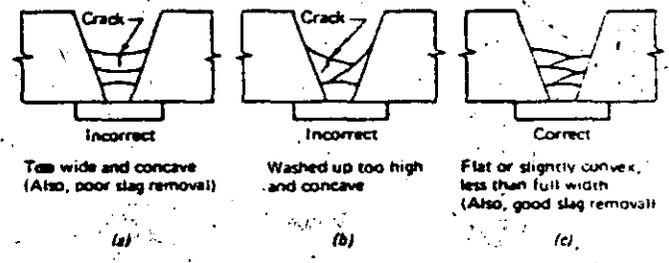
Wide, concave passes (a and b) in a multiple-pass weld may crack. Slightly convex beads (c) are recommended.
